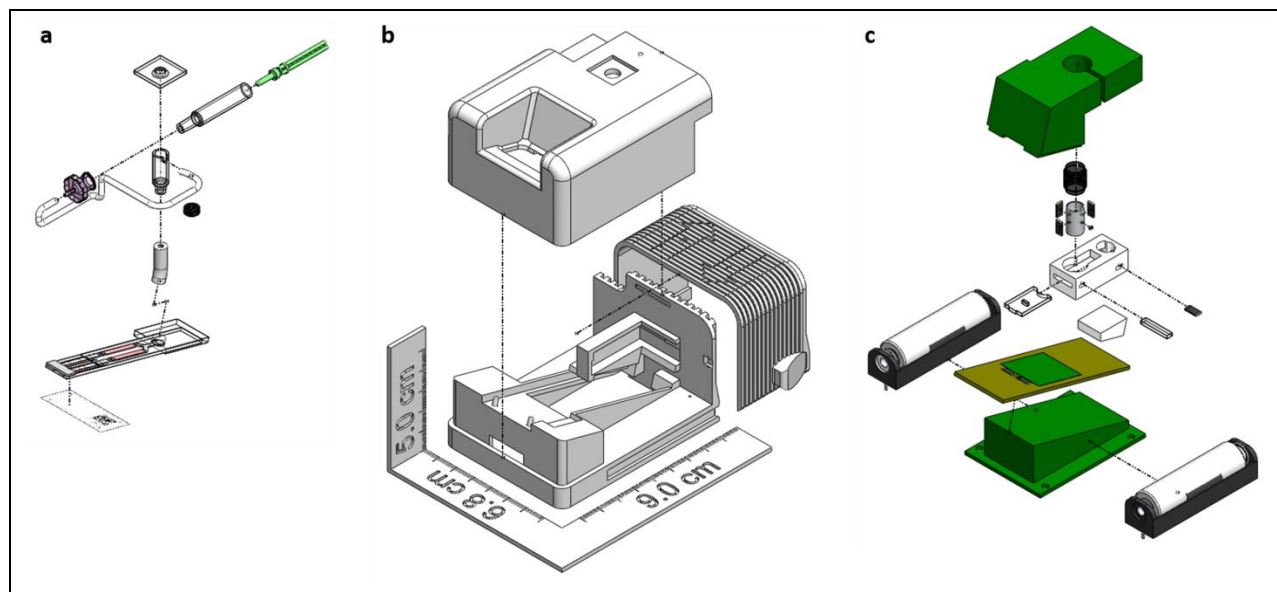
Exploded view of one of four identical MAD NAAT prototypes. (a) Fluid path components, including fluid storage and introduction syringe, sample chamber, and 2DPN. (b) Housing components: base, lid, and slider. (c) Supporting components, including electronics, valves, batteries, and insulation.
